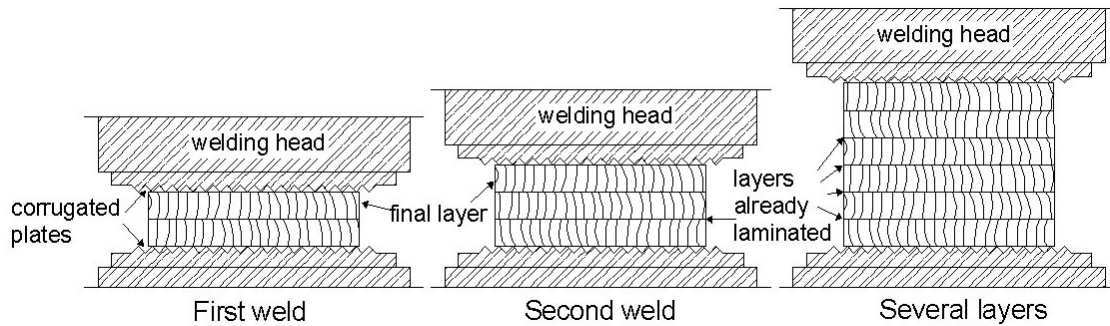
Method of welding of multi-layered laminates. One layer is continuously welded on the already existing layers with only short breaks between the welding steps.
